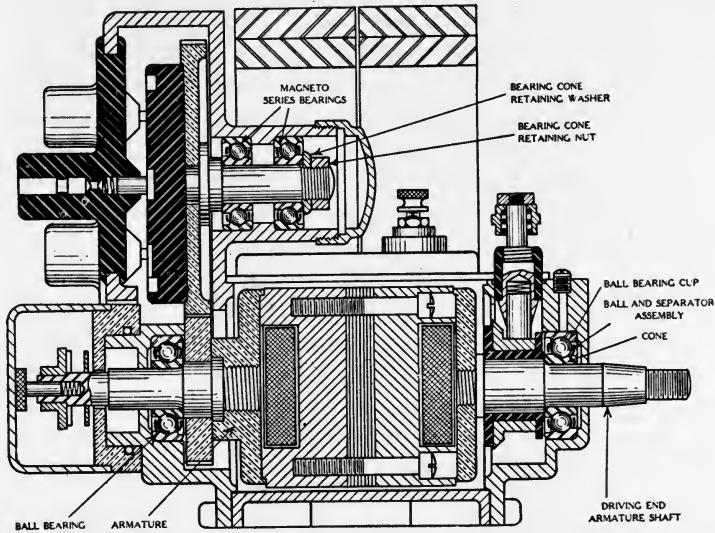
Sectional view of magneto showing method of mounting ball bearings.
